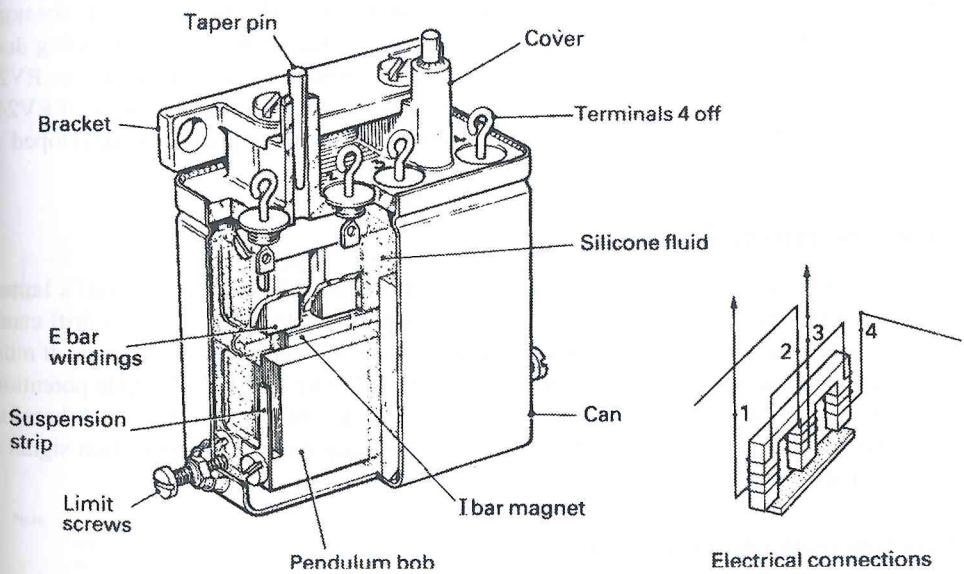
The pendulum assembly and its electrical connections. (Reproduced courtesy S. G. Brown Ltd.)
